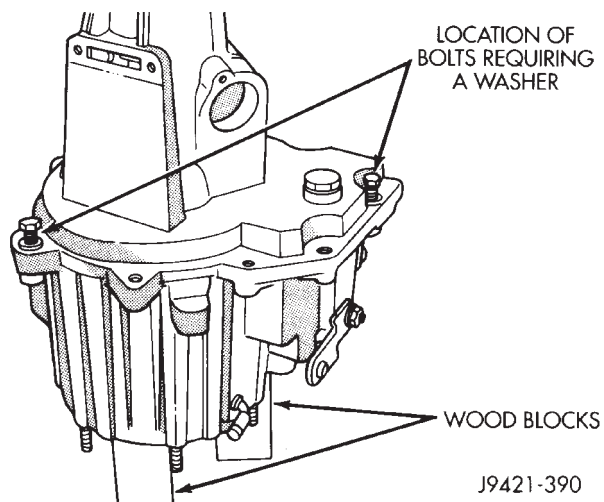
Location Of Rear Extension Bolts Requiring Washers
